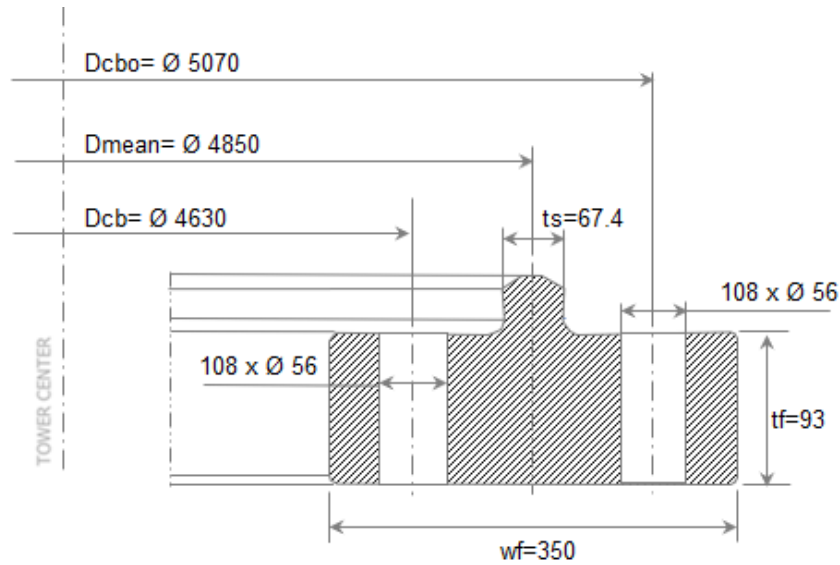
SG 6.6-170 T135-54A Tower bottom T-Flange dimensions
